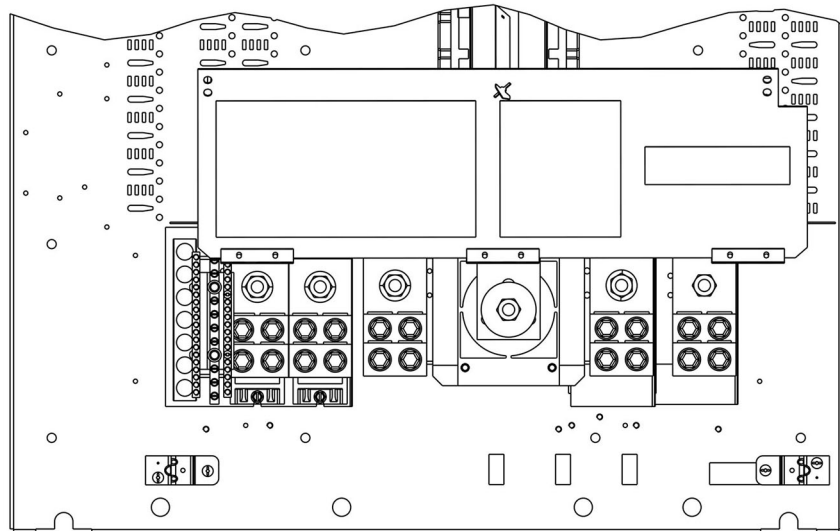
Neutral assembly installation onto HCR-U panel, mechanical lug shown.
